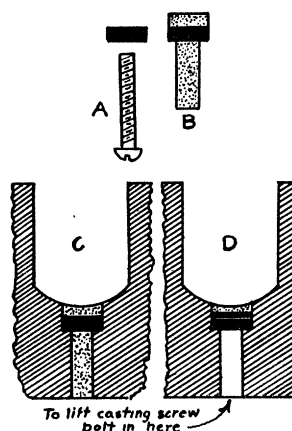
A—the bolt and nut; B—the nut with plasticine cores; C—the jack assembly cast into the mold; D—plasticine cores removed, pressure plate added above nut, and plasticine filling added above pressure plate; mold ready to pour casting.
